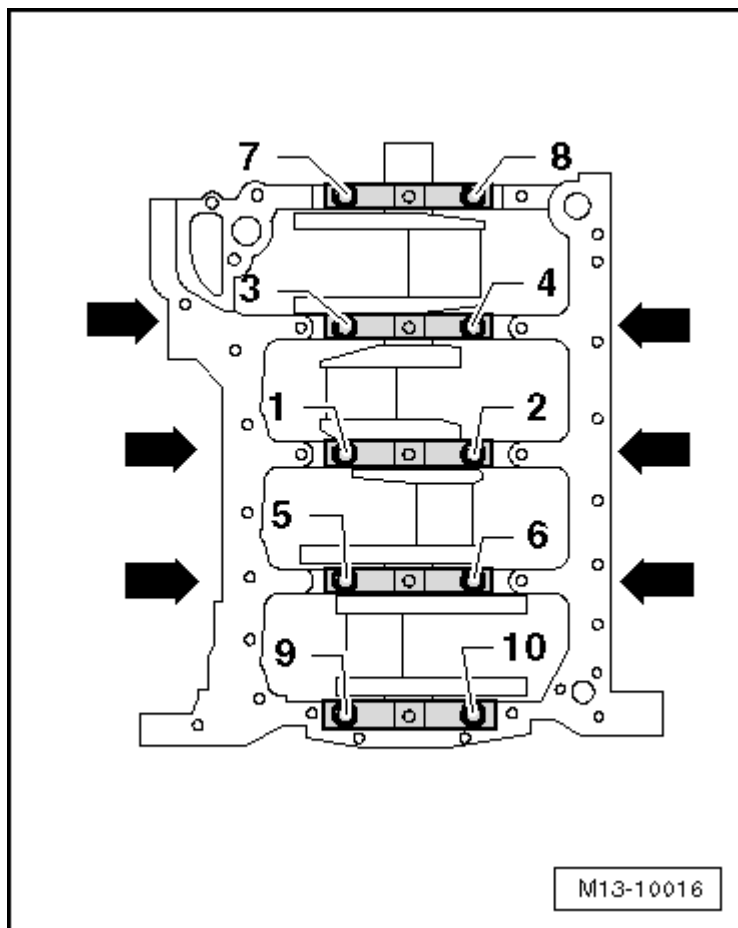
Identifying Crankshaft Bearing Cap Bolt Tightening Sequence and Specification
